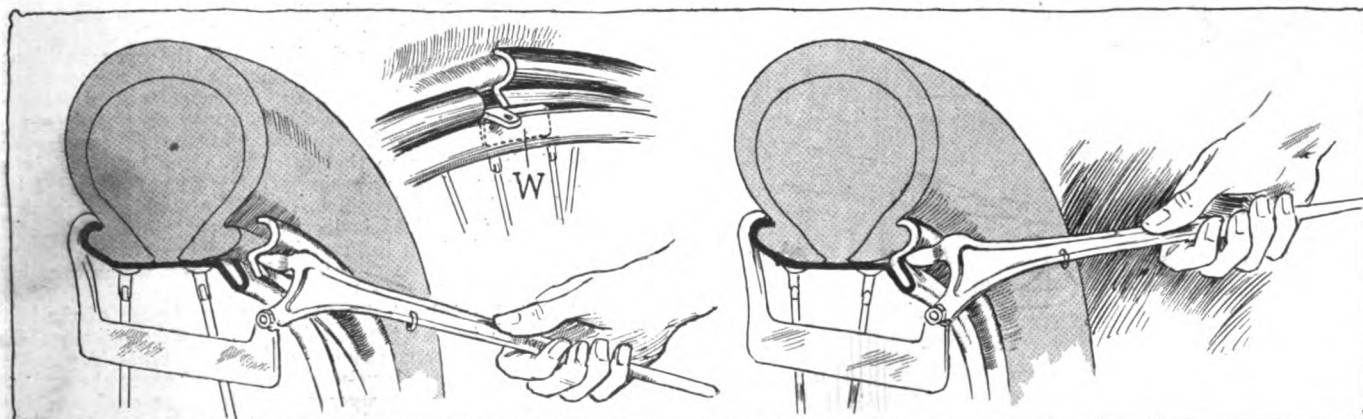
Detail removing the Houk rim. Tool used for removing the locking ring. Fig. 8—Same tool inserting the ring
